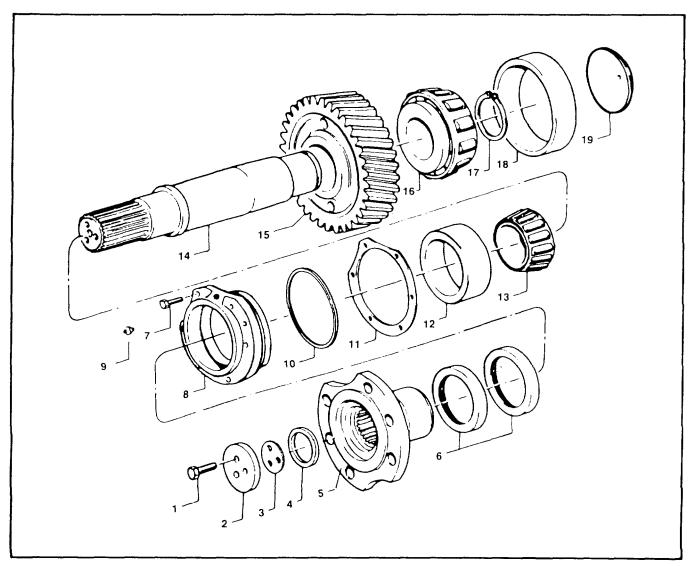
Output Shaft Assembly-DC-Exploded View.
